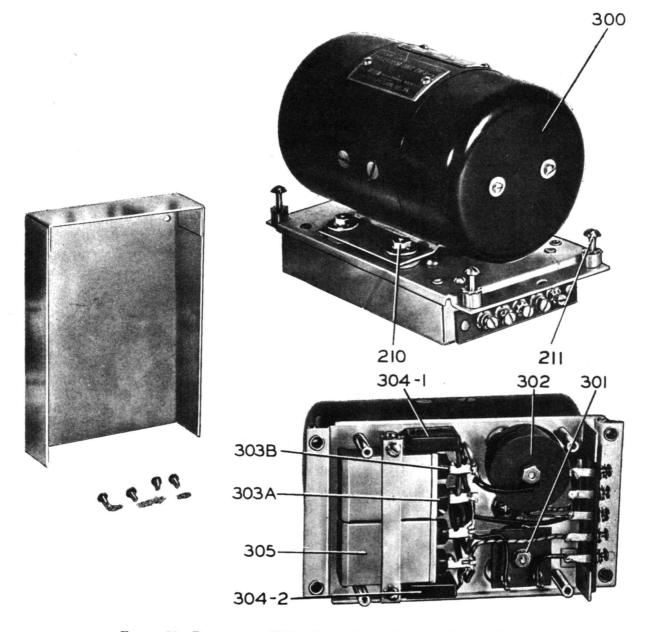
DYNAMOTOR DM-24-B AND VIEW SHOWING FILTER OPEN
